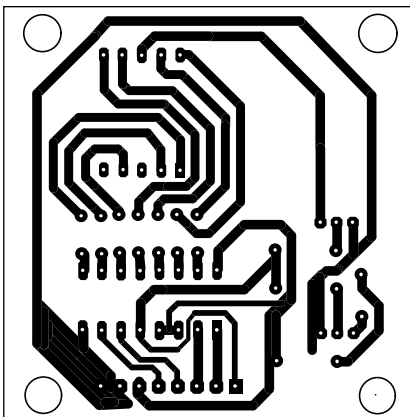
Actual-size, single-side PCB for latch decoder/driver and display circuit of one subunit
